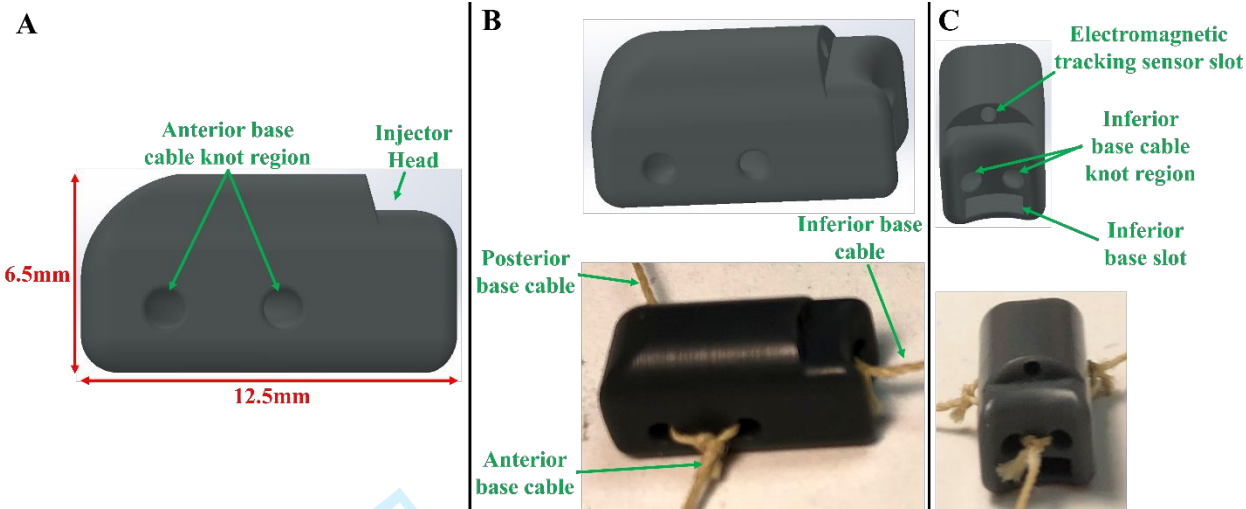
Design and prototype of the injector head. The injection system is not yet incorporated. (A) Side view of the injector head with knot regions for cables from each of the bases. (B) View of the CAD model and prototyped model for the injector head. The cables from each of bases are attached to the injector head. (C) Second view of the CAD model and prototyped model. Slots for a 6-DOF electromagnetic tracking sensor and the inferior base flap are shown, as well as the inferior base cable knot region.
